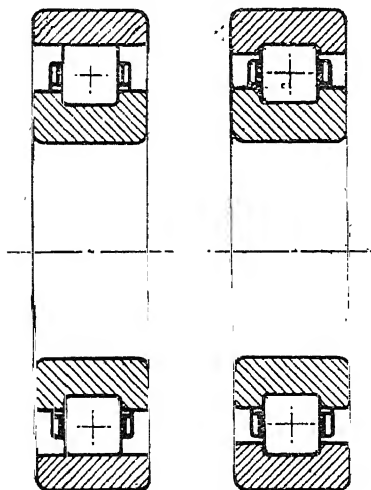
Standard pattern single-row rigid roller journal bearing.
